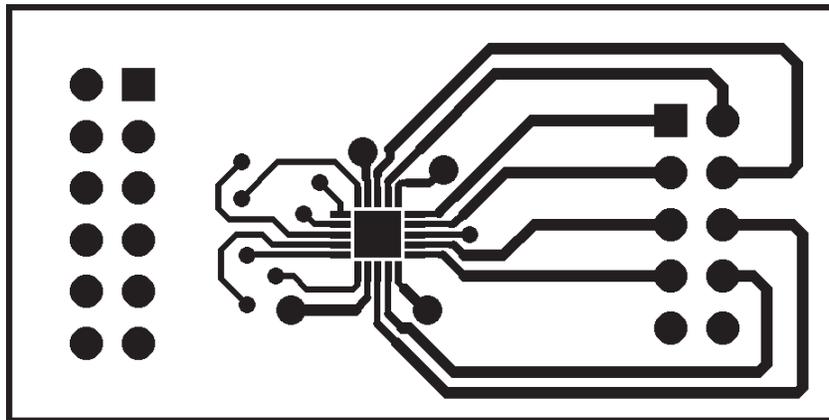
MAX4824PMB1 Peripheral Module PCB Layout—Component Side
